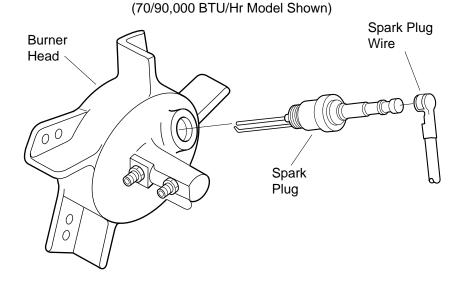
Spark Plug Removal, 70/90/150,000 BTU/Hr Models
